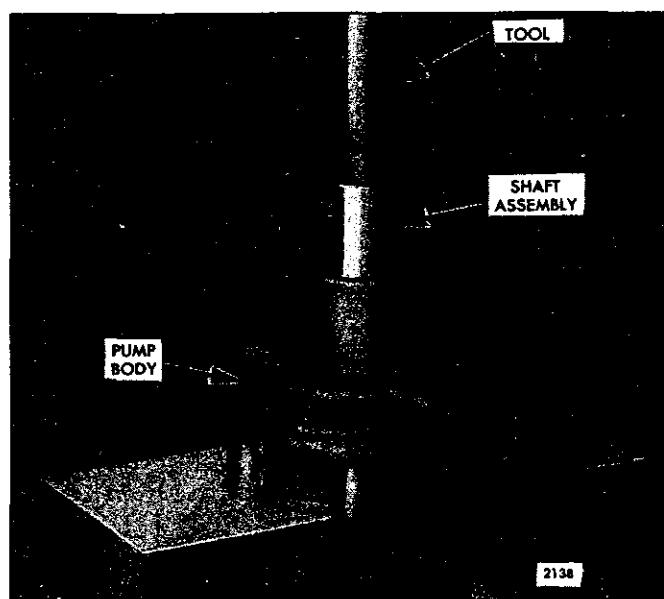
Removing Shaft from Impeller with Tools J 8329 and J 358-1
